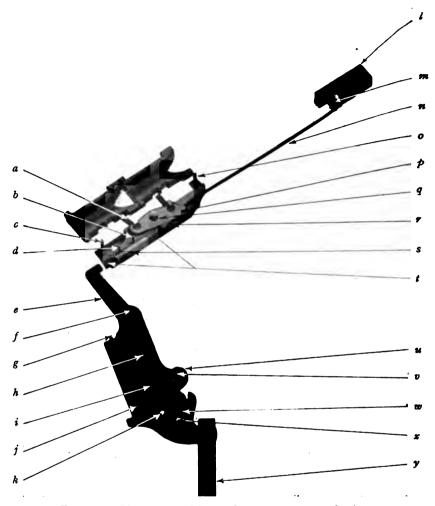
Linotype; models 4 and 9; escapement mechanism.
